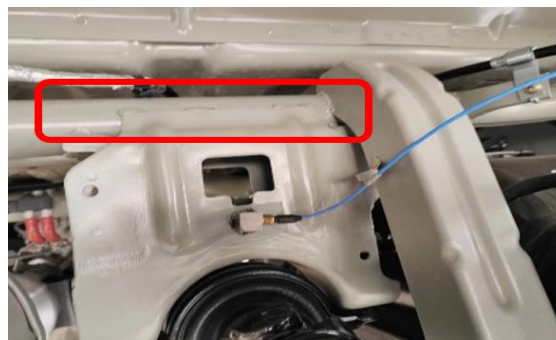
Welding status of the middle support of the transmission shaft and the pipe beam.
